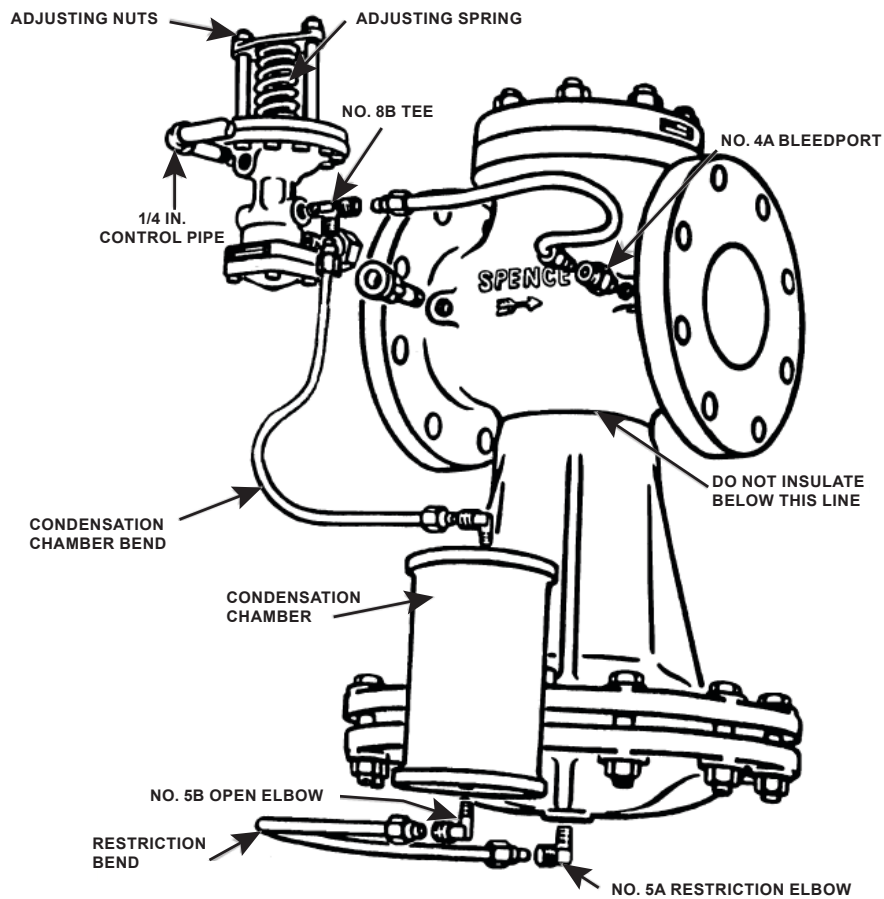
Regulator Assembly for Type E5 Main Valve with Condensation Chamber
